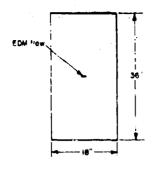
SHEET FRACTURE TOUGH-NESS SPECIMEN
